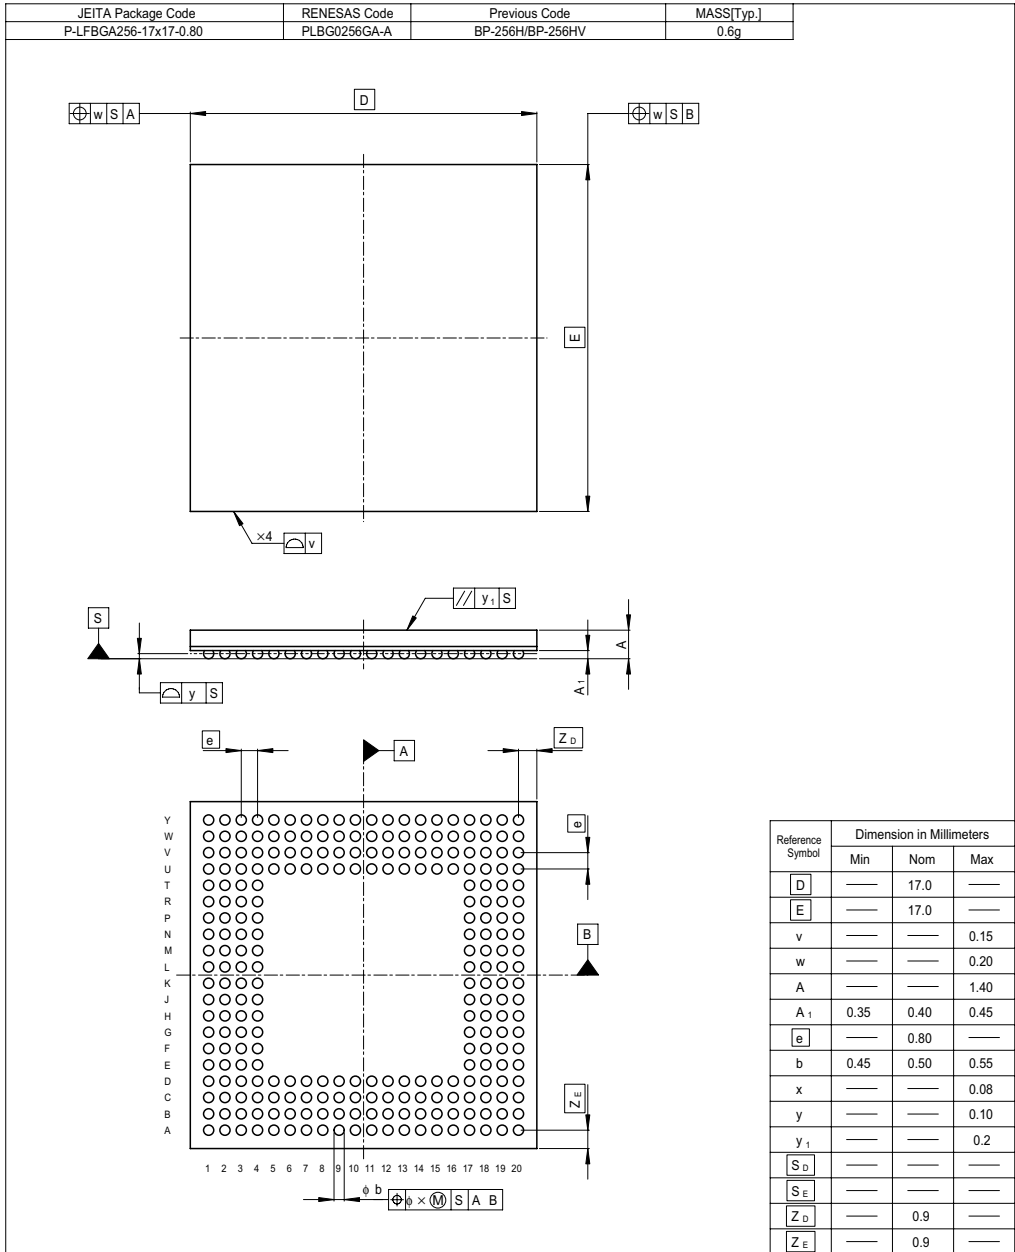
Package Dimensions (PLBG0256GA-A (BP-256H/HV))
